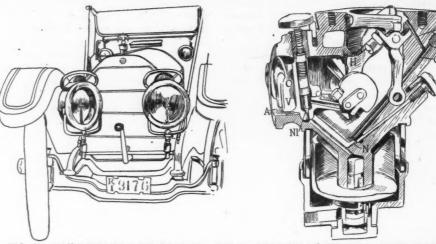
FOX DIRIGIBLE HEADLIGHTS FIG. 9-SECTION OF KENNEDY CARBURETER.
